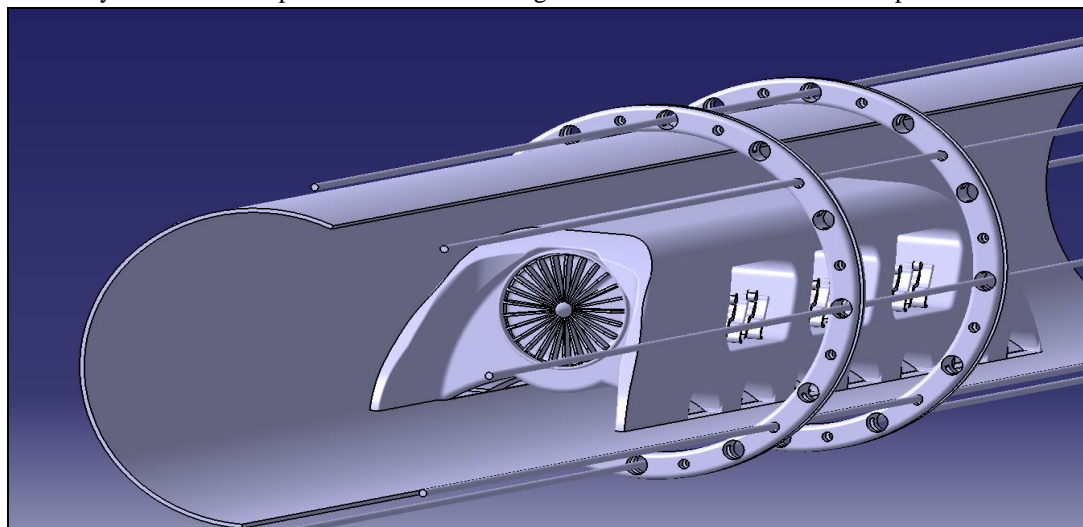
Capsule inside the Tube of Hyperloop System: 3D Cut Section View (CATIA V5 R20)
